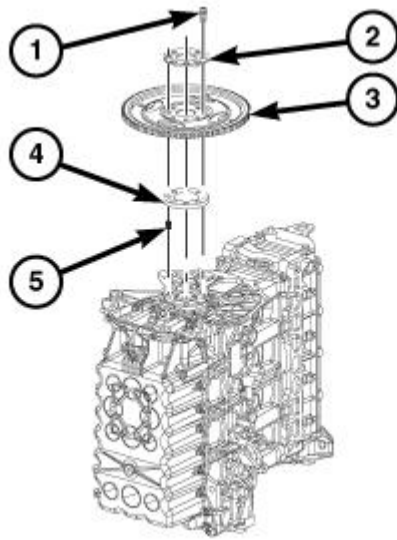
Bolts, Backing Plate, Flexplate/Flywheel, Tone Wheel & Dowel Pin
